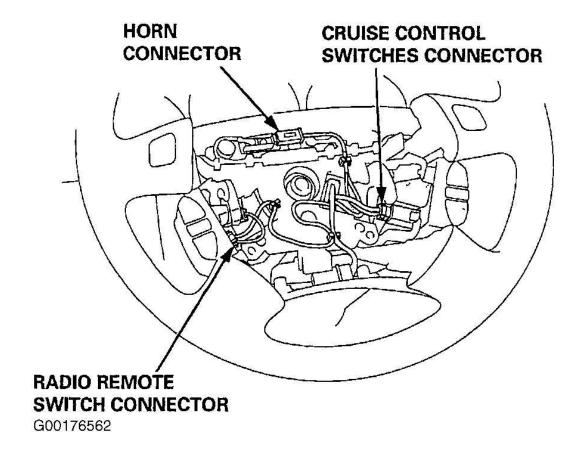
Locating Horn Connector, Cruise Control Switch & Radio Remote Switch (3.5RL) Courtesy of AMERICAN HONDA MOTOR CO., INC.
